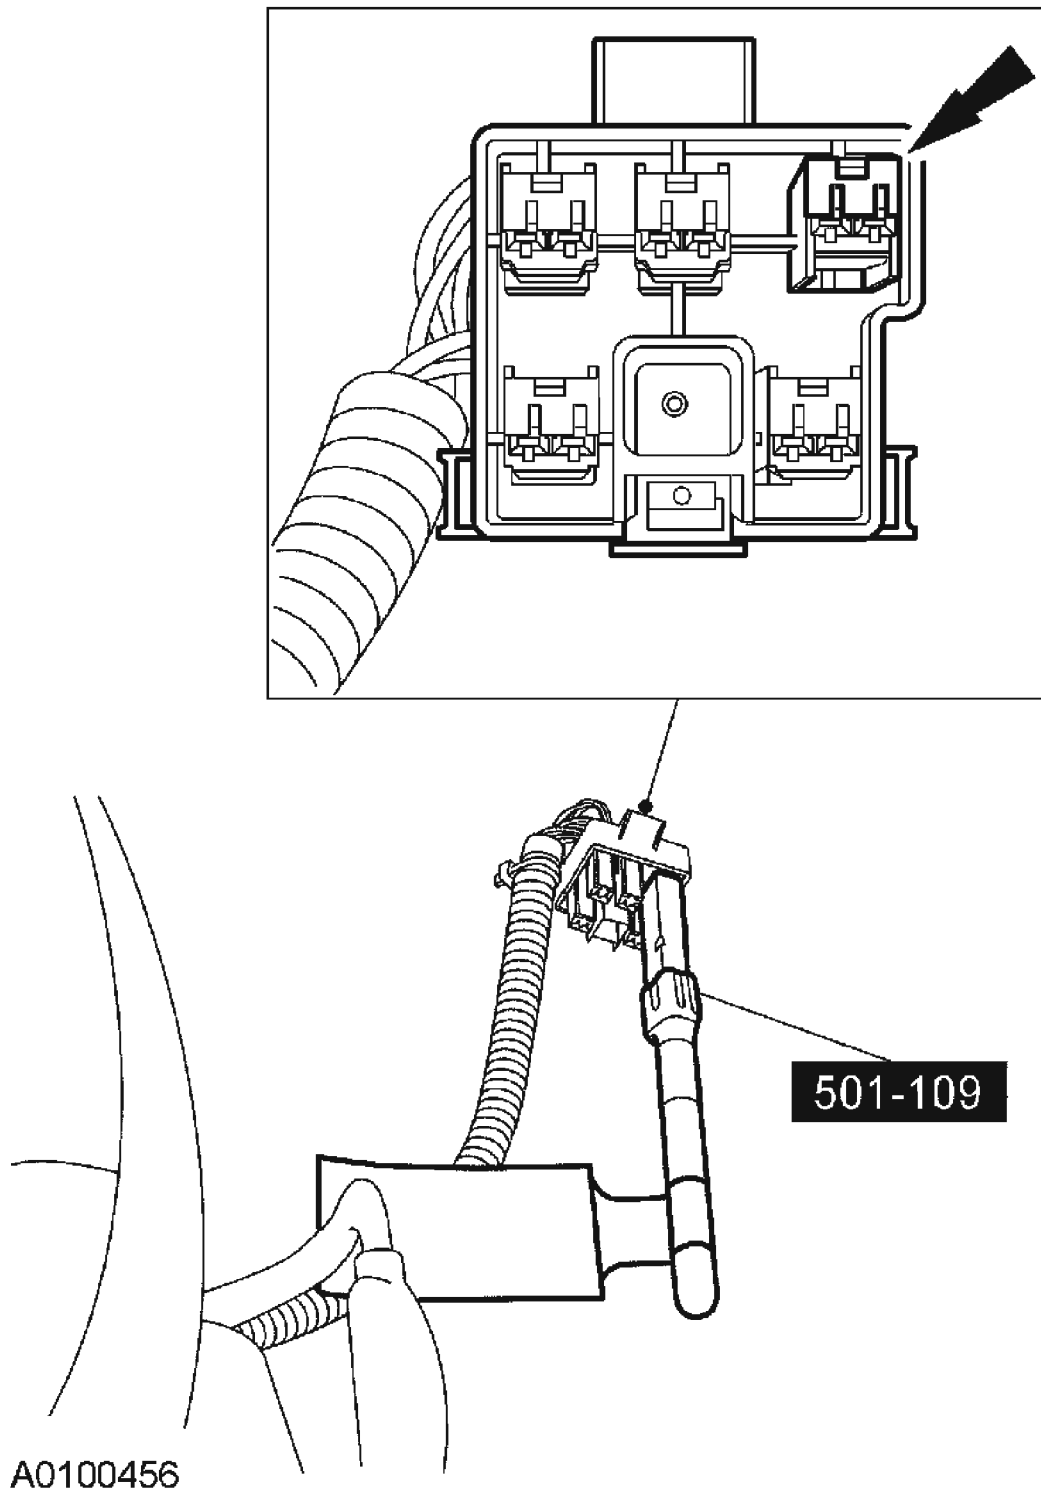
Removing Restraint System Diagnostic Tool From Vehicle Harness Side Of Passenger Seat Side Air Bag Module Electrical Connector
